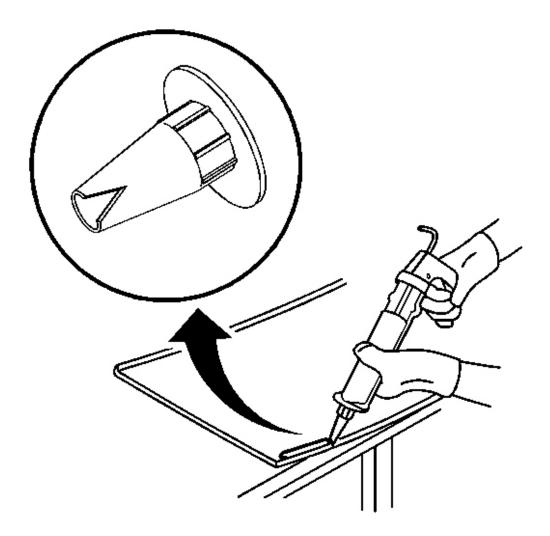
Applicator Nozzle Hole Measurements Courtesy of GENERAL MOTORS CORP.
